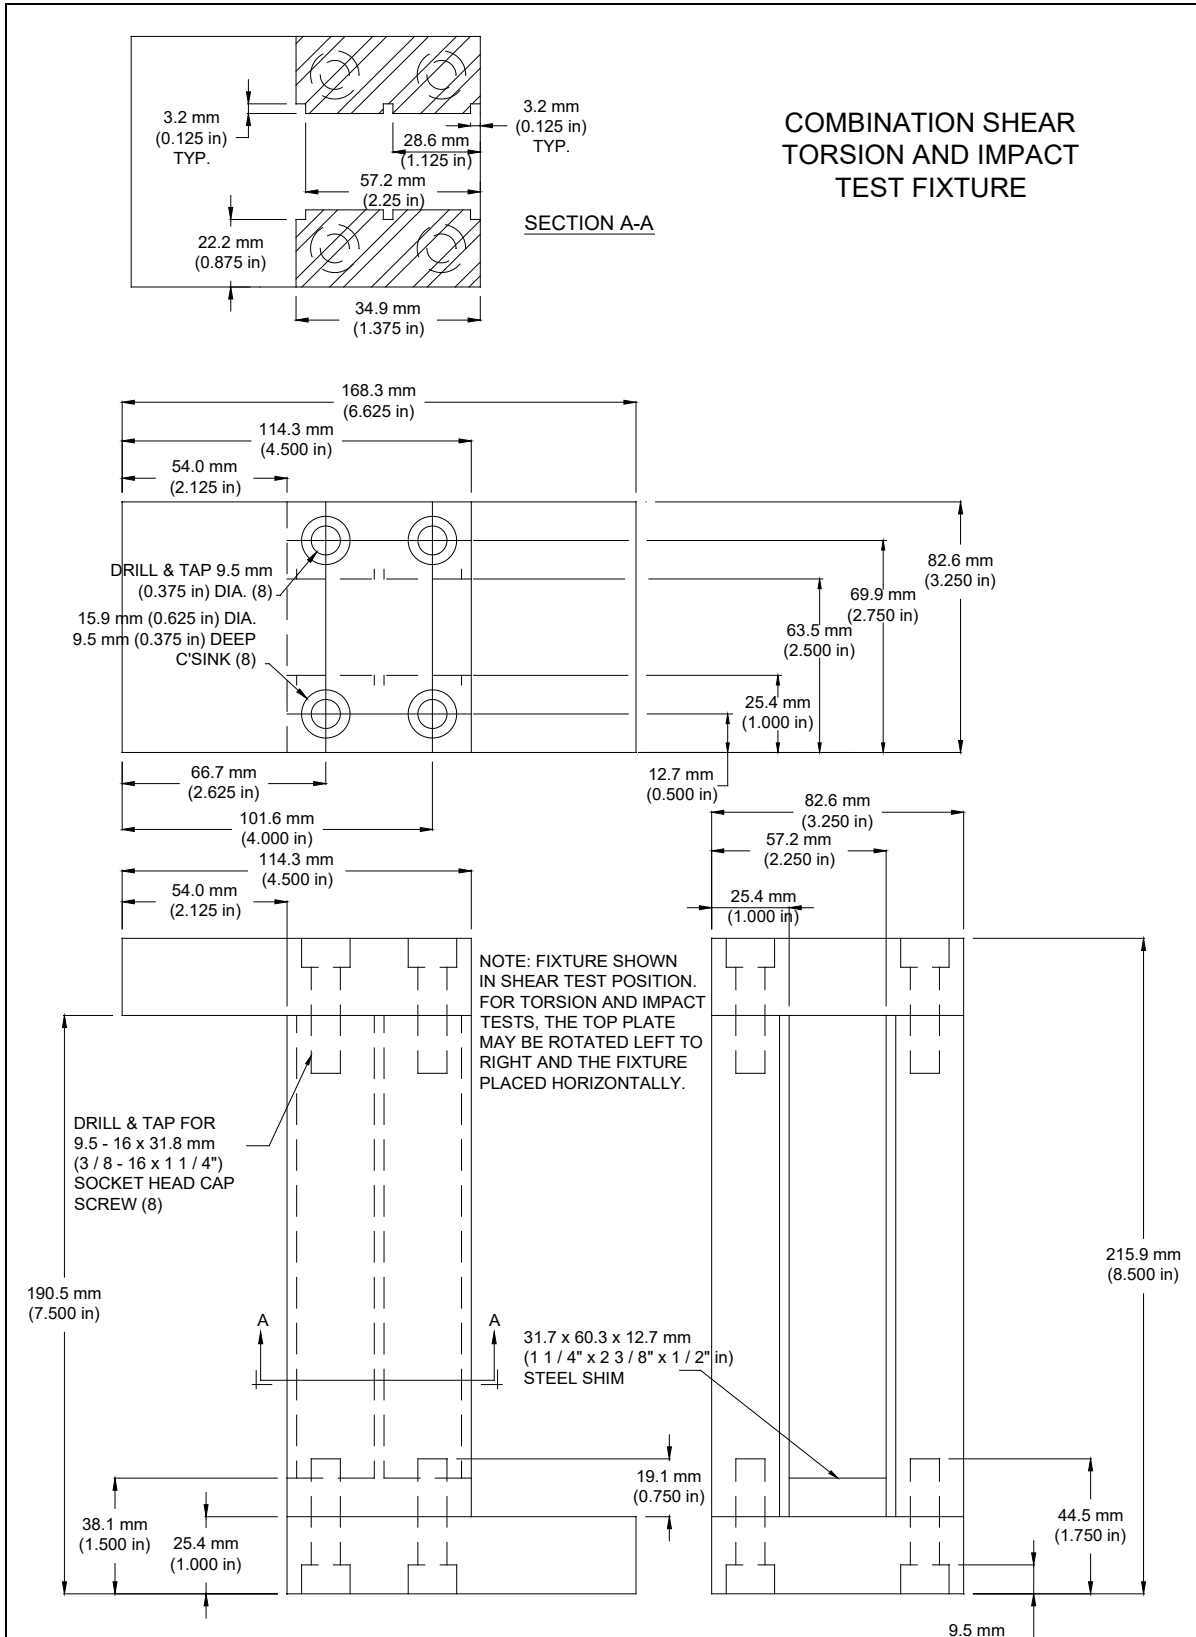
Combination Shear Torsion and Impact Test Fixture Schematic
